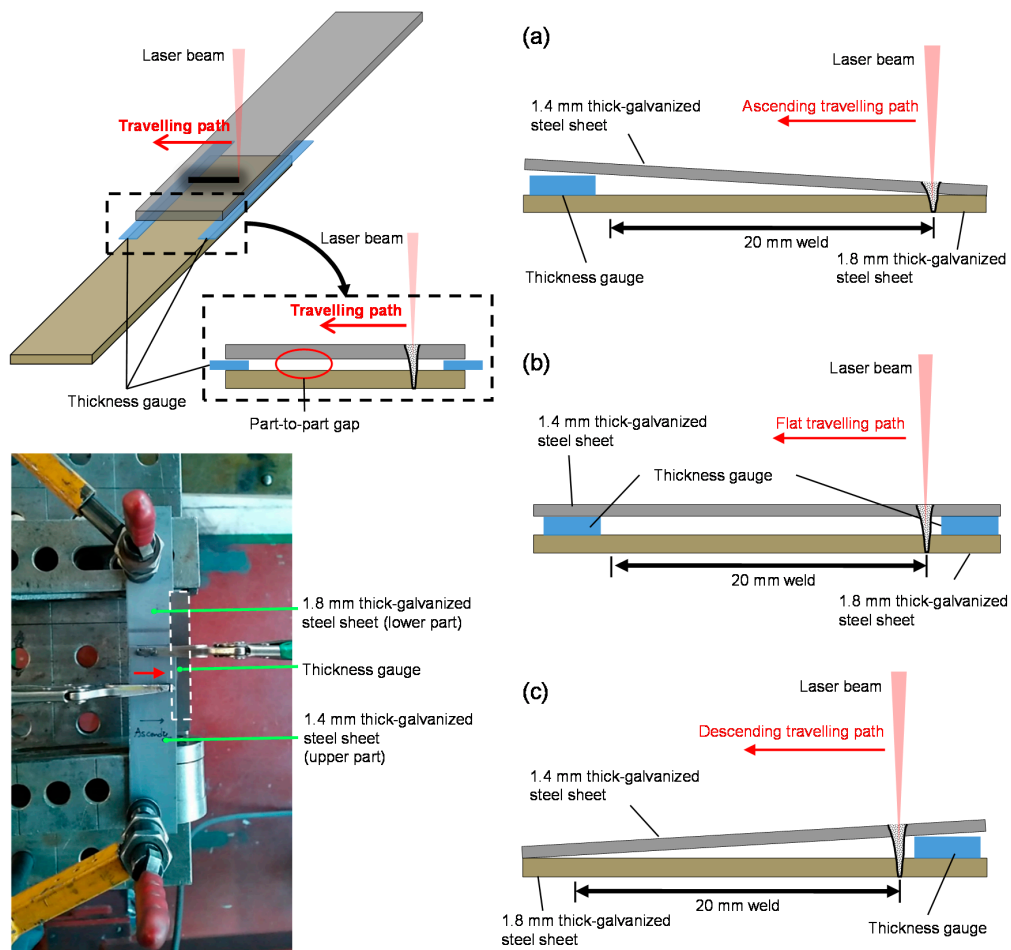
Weld joint configuration clamped at the two corners and the three types of travelling paths: (a) ascending; (b) flat; (c) descending.
